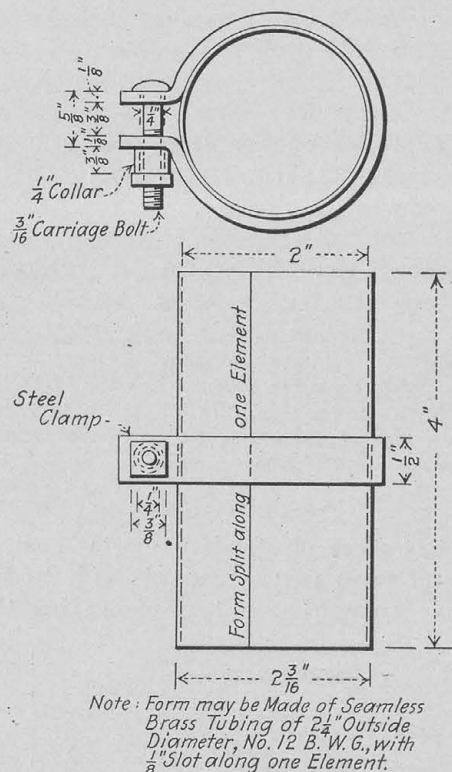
Details for 2 by 4-in. Cylinder Form.
